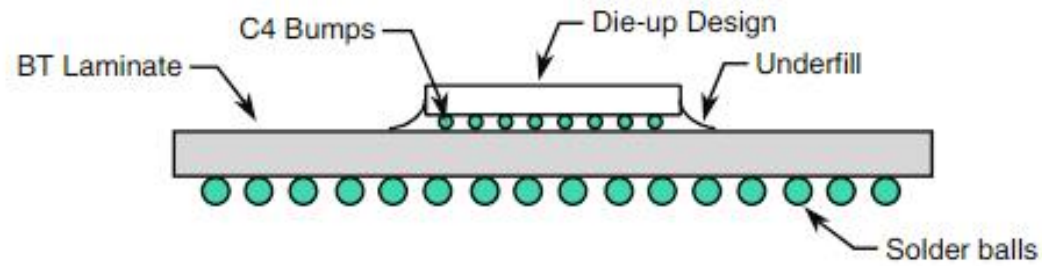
Cross sectional view of a BGA packaged IC [10]
